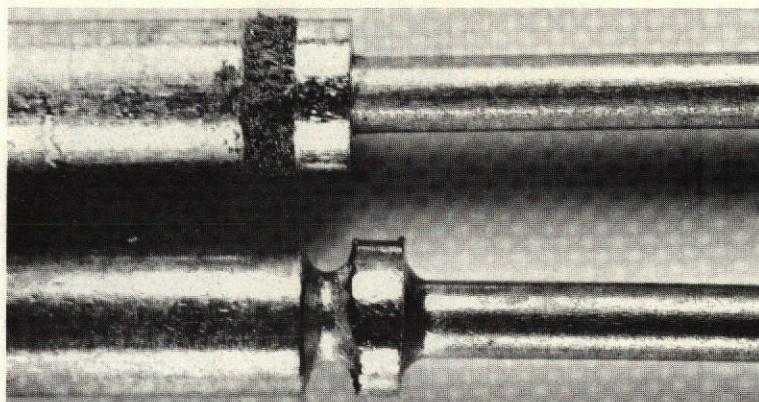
Sample Braze D/2 Size Thermocouple to Well With
